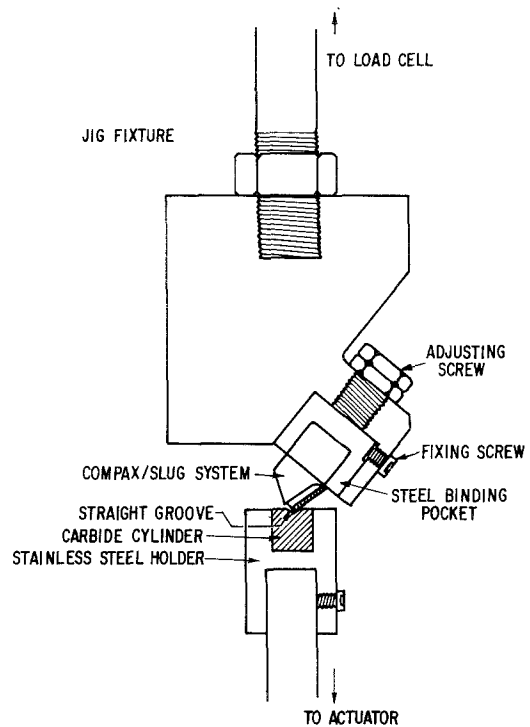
Schematic view of the specimen jig fixture for incorporation into a dynamic test machine.
